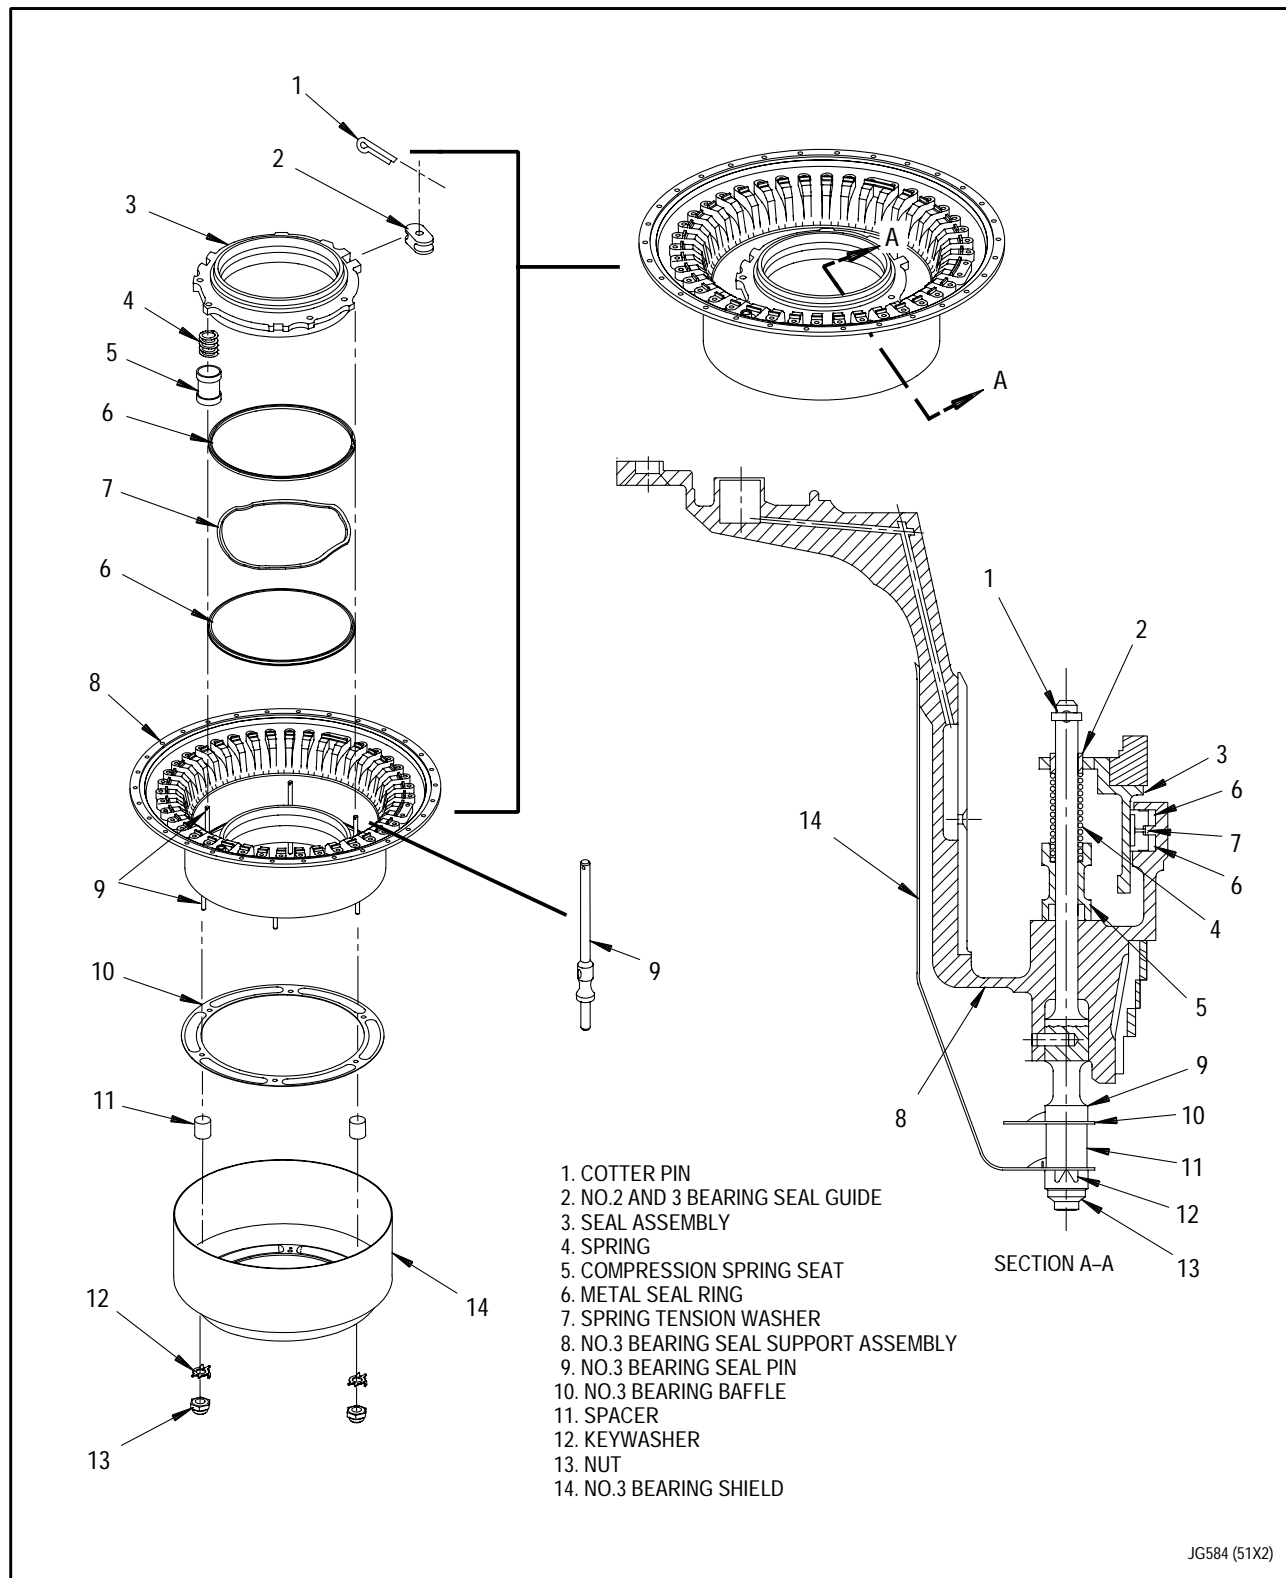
No. 3 Bearing Rear Seal Assembly (Typical PN 4075036-01) - Assembly
